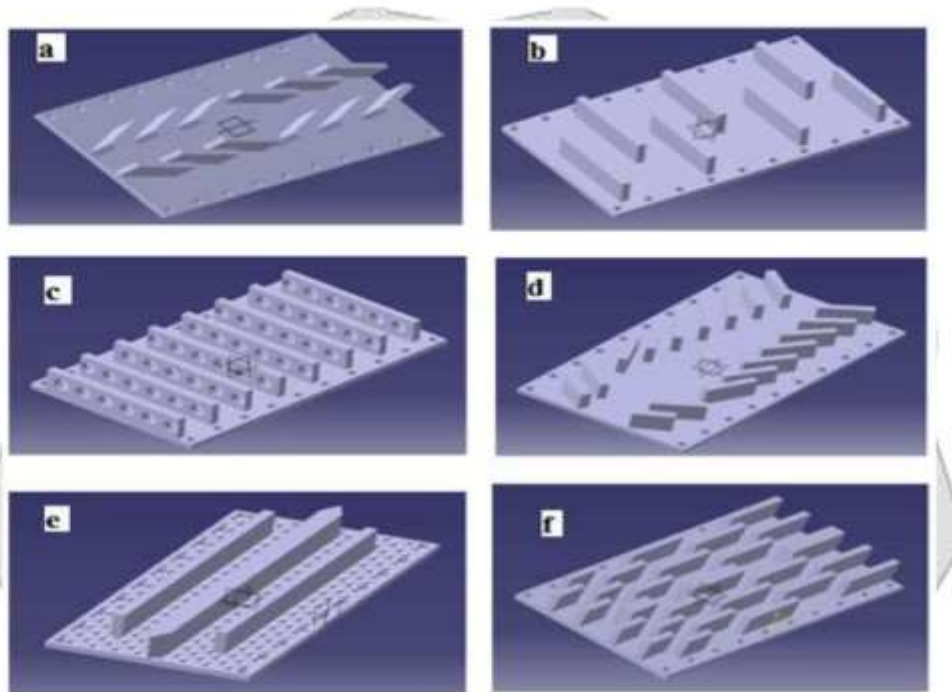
(a) Inclined plate structure, (b) Serial plate structure, (c) Separate plate with holes, (d) Fishbone-shape structure, (e) Dimple surface structure, (f) Accordion-shaped structure [6]
